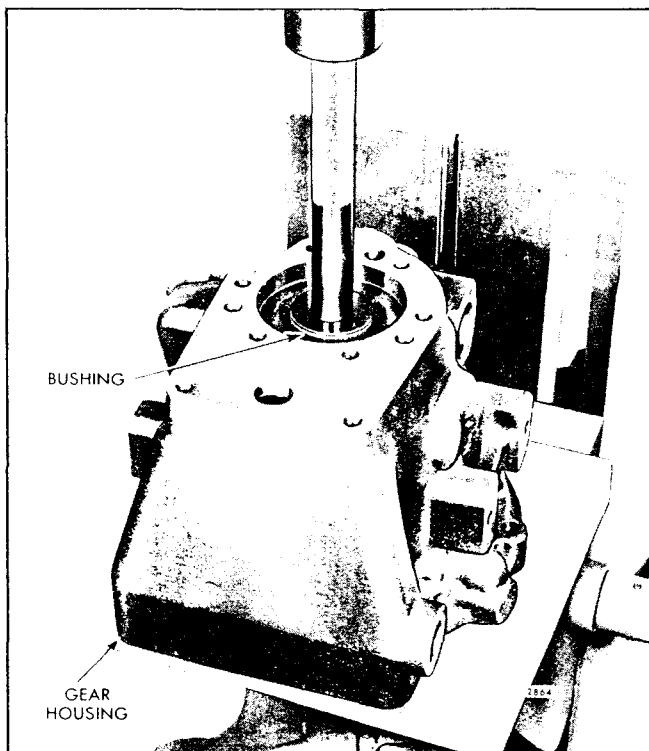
Installing Drive Shaft Bushings in Reverse Gear Housing
